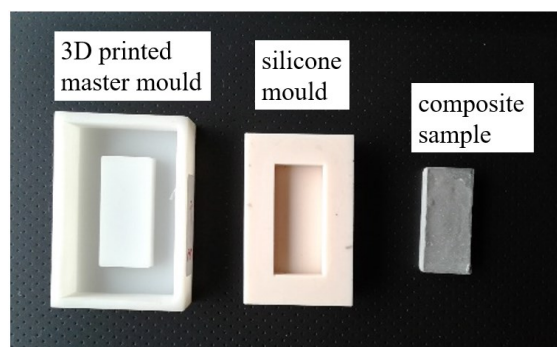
3D printed master mould with silicone mould and an example of composites.
